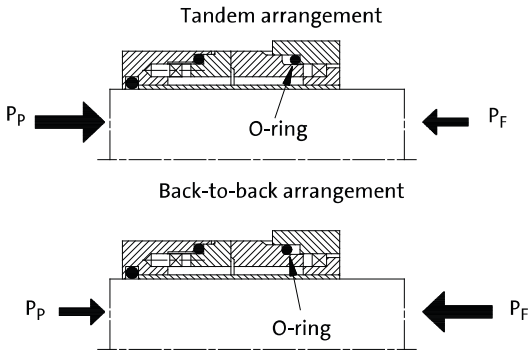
Cartex-DE shaft seal in tandem - and back-to-back arrangement
